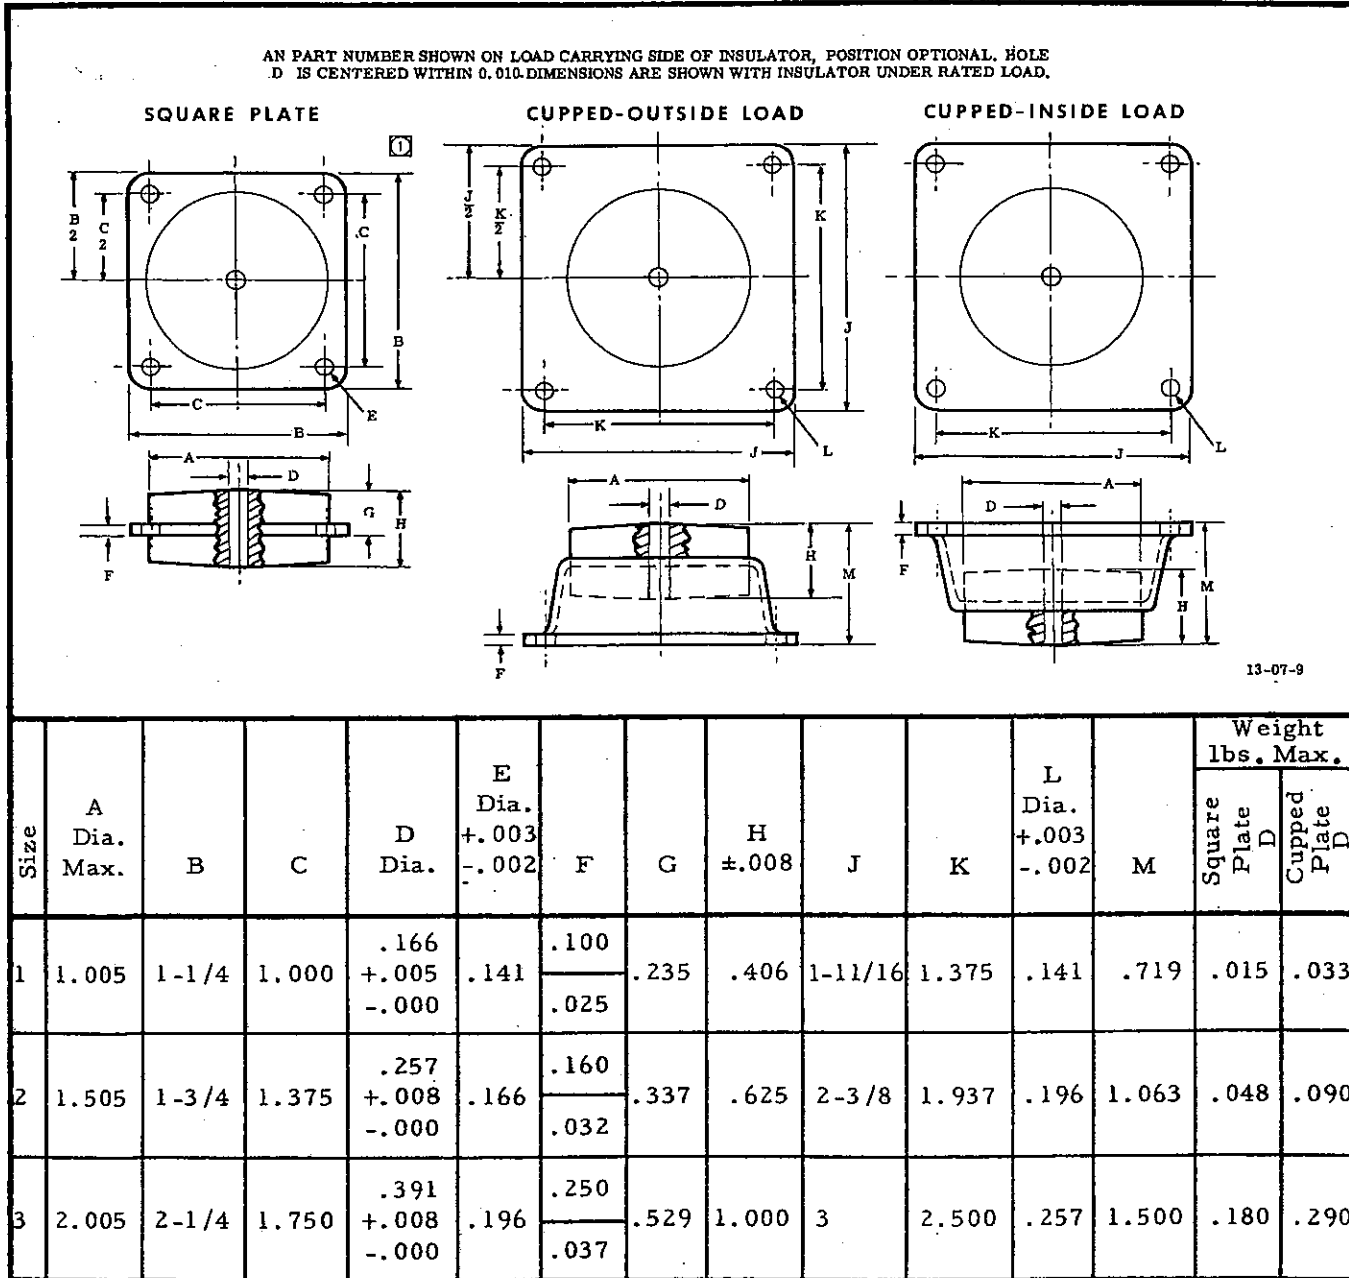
(Sheet 1 of 2) Plate Vibration Insulators
